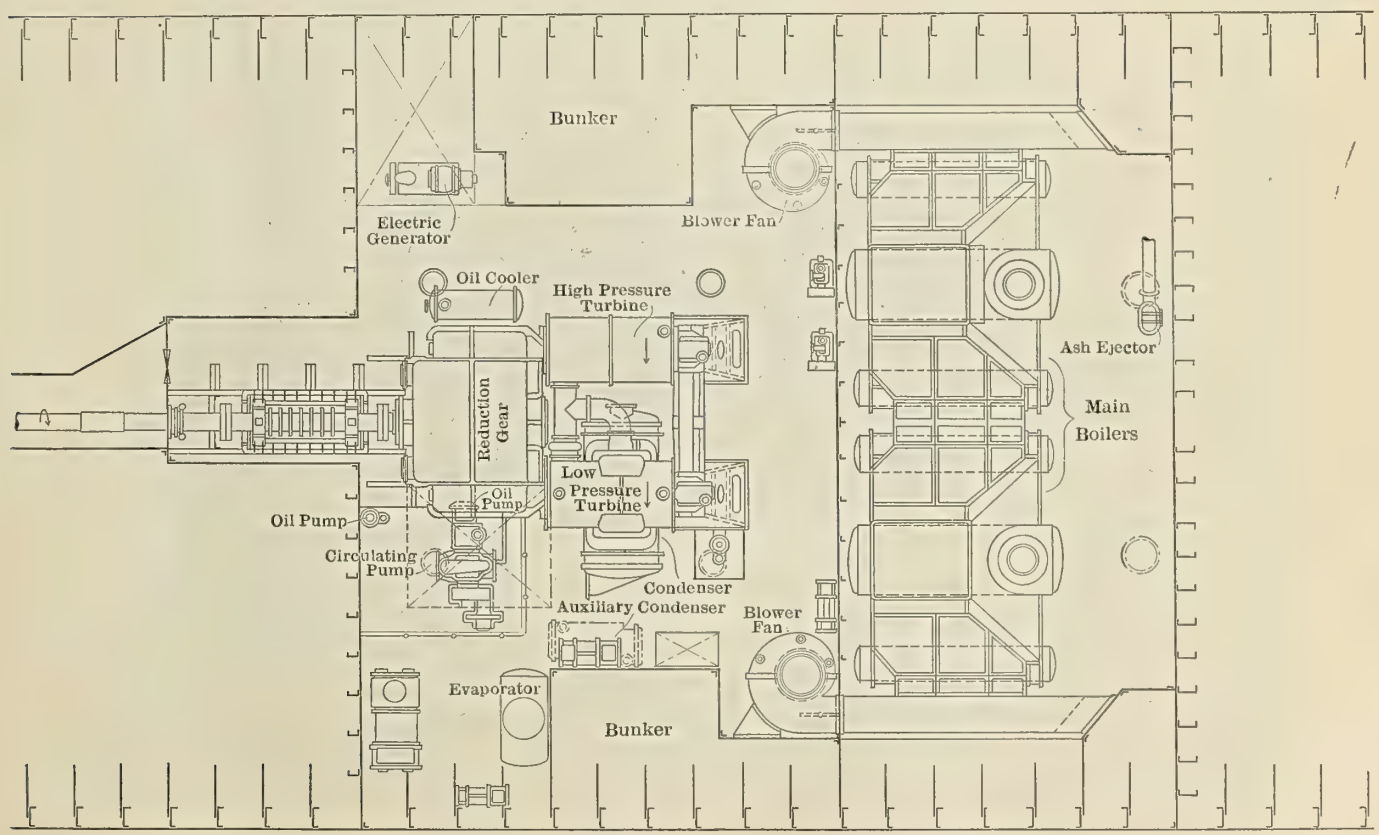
Plan of Machinery Space, 3,000 Horsepower Cargo Steamer
